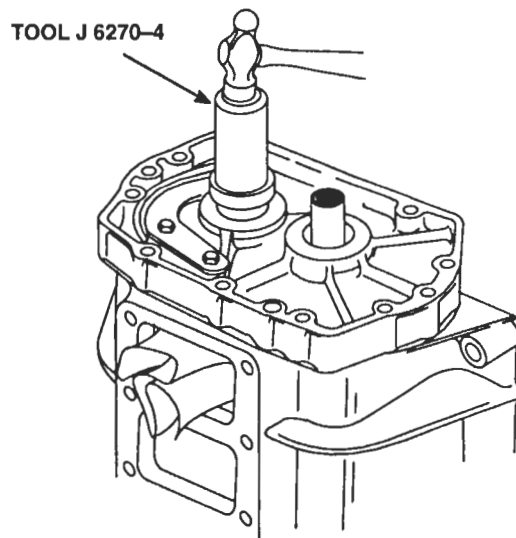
Installing Roller Bearings on Rotor Shaft and in Front End Plate
